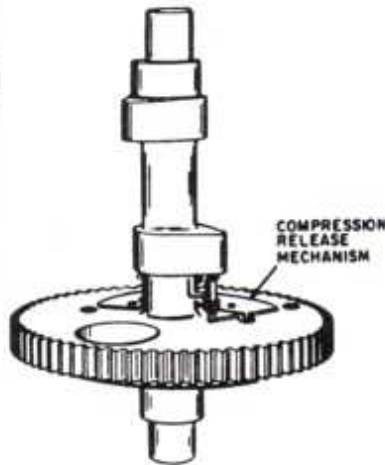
View of Insta-matic Ezee-Start compression release camshaft assembly used on all models except HH80, HH100 and HH120.
